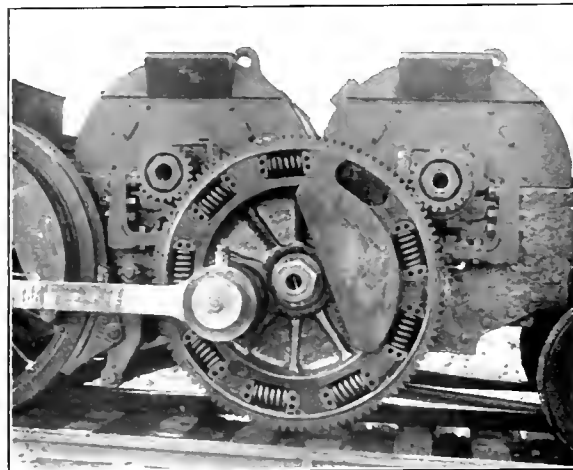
A View of the Jack Shaft With Its Spring Gear
